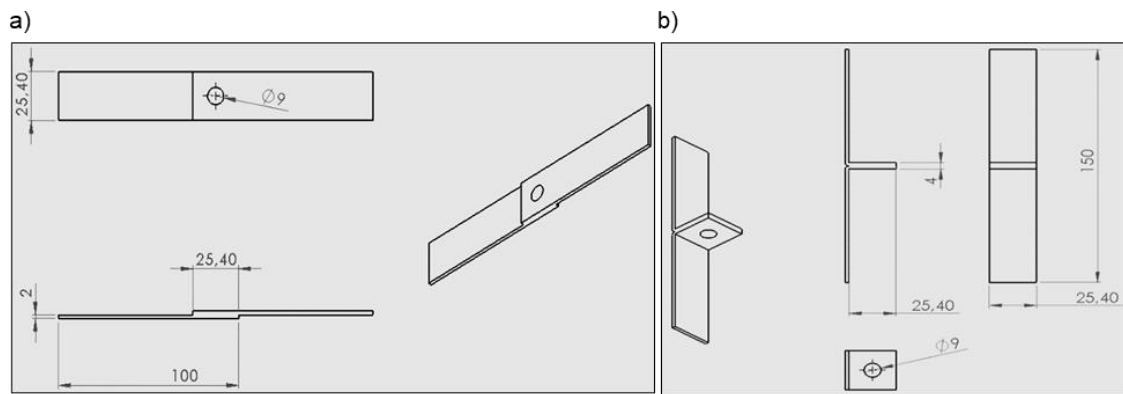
a) Lap Shear test configuration and b) Coach Peel test configuration – dimensions presented in mm.
